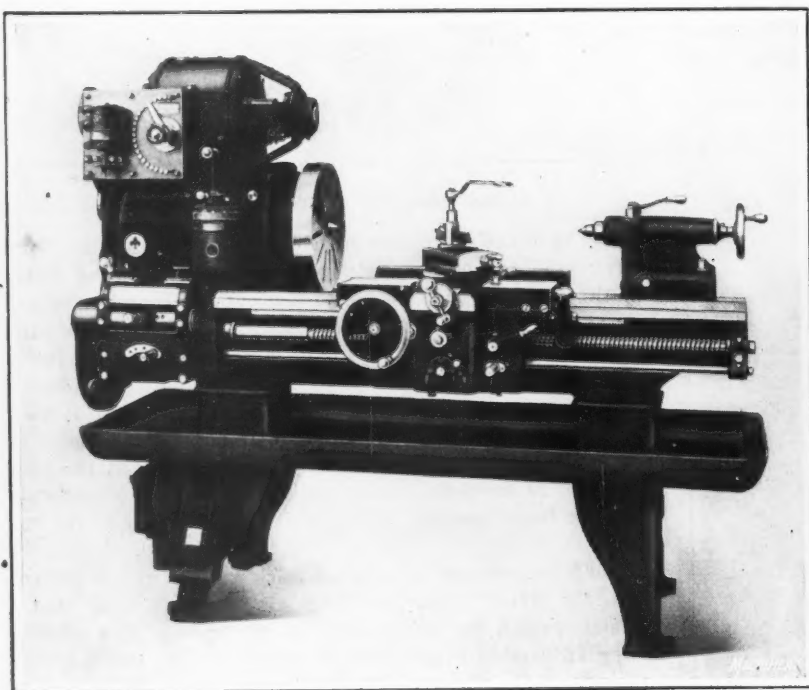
LeBlond 15-inch Heavy-duty Engine Lathe equipped with Variable-speed Geared Motor Drive
